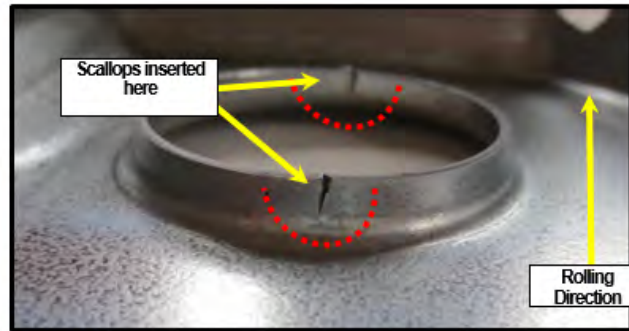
B-21: Actual part where the edge fractures are following the rolling direction. In this case, as the flange wasn't needed around the entire perimeter of the hole, scallops were inserted in the locations of the fractures.^{M-7}
